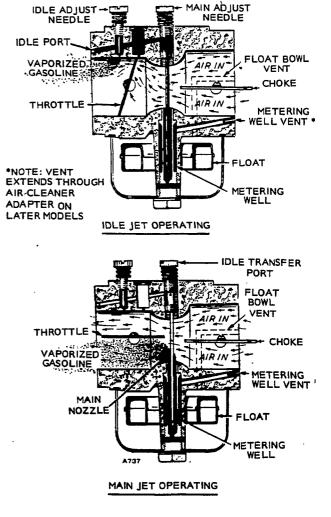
CARBURETOR CIRCUITS PRIOR TO SPEC R
